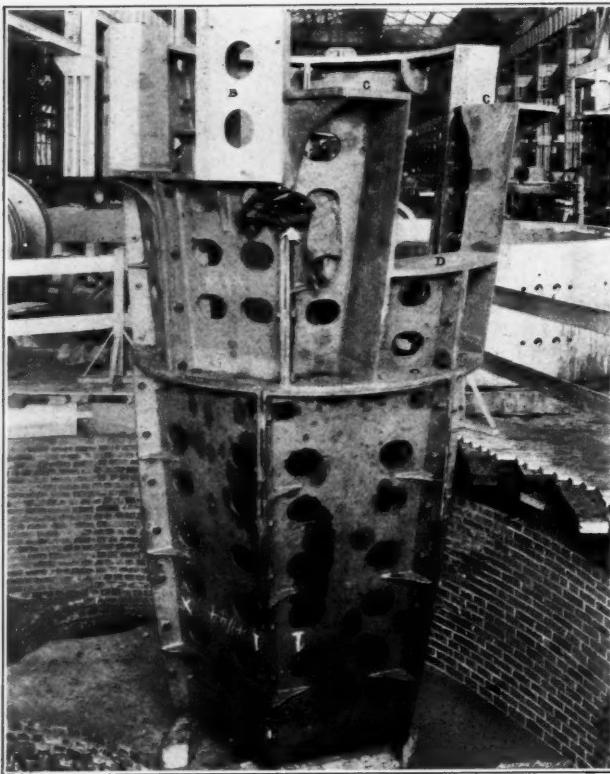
Cast-Iron Support for the Boring Bar and Mechanism.
